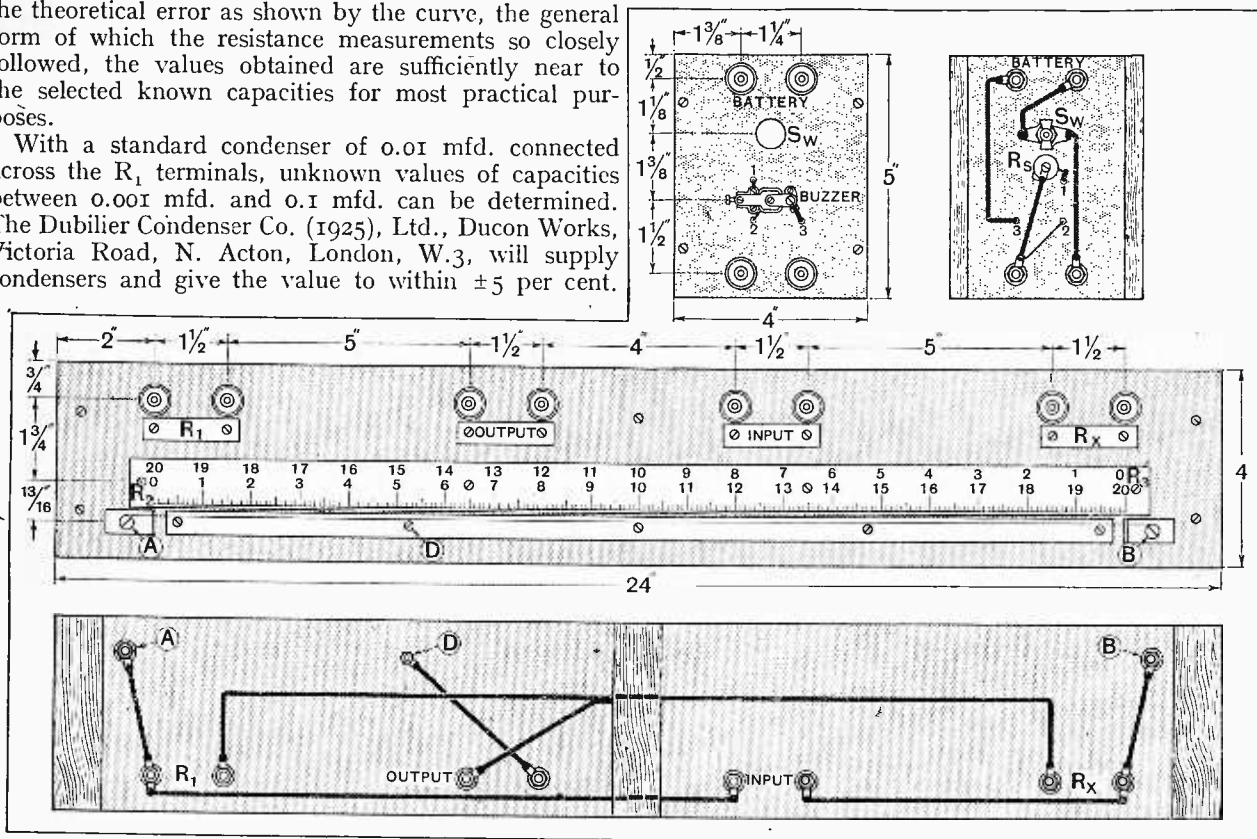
Dimensional layout and wiring of the bridge and buzzer unit.
